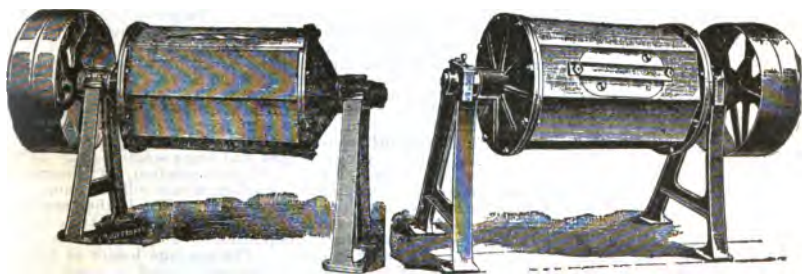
,381.—Hanson and Van Winkle tumbling barrel with convex head for dry tumbling. The type of barrel is especially adapted for removing burrs and for smoothing small castings. This barrel gives three distinct motions to the articles: rolling, shaking, and spreading.
